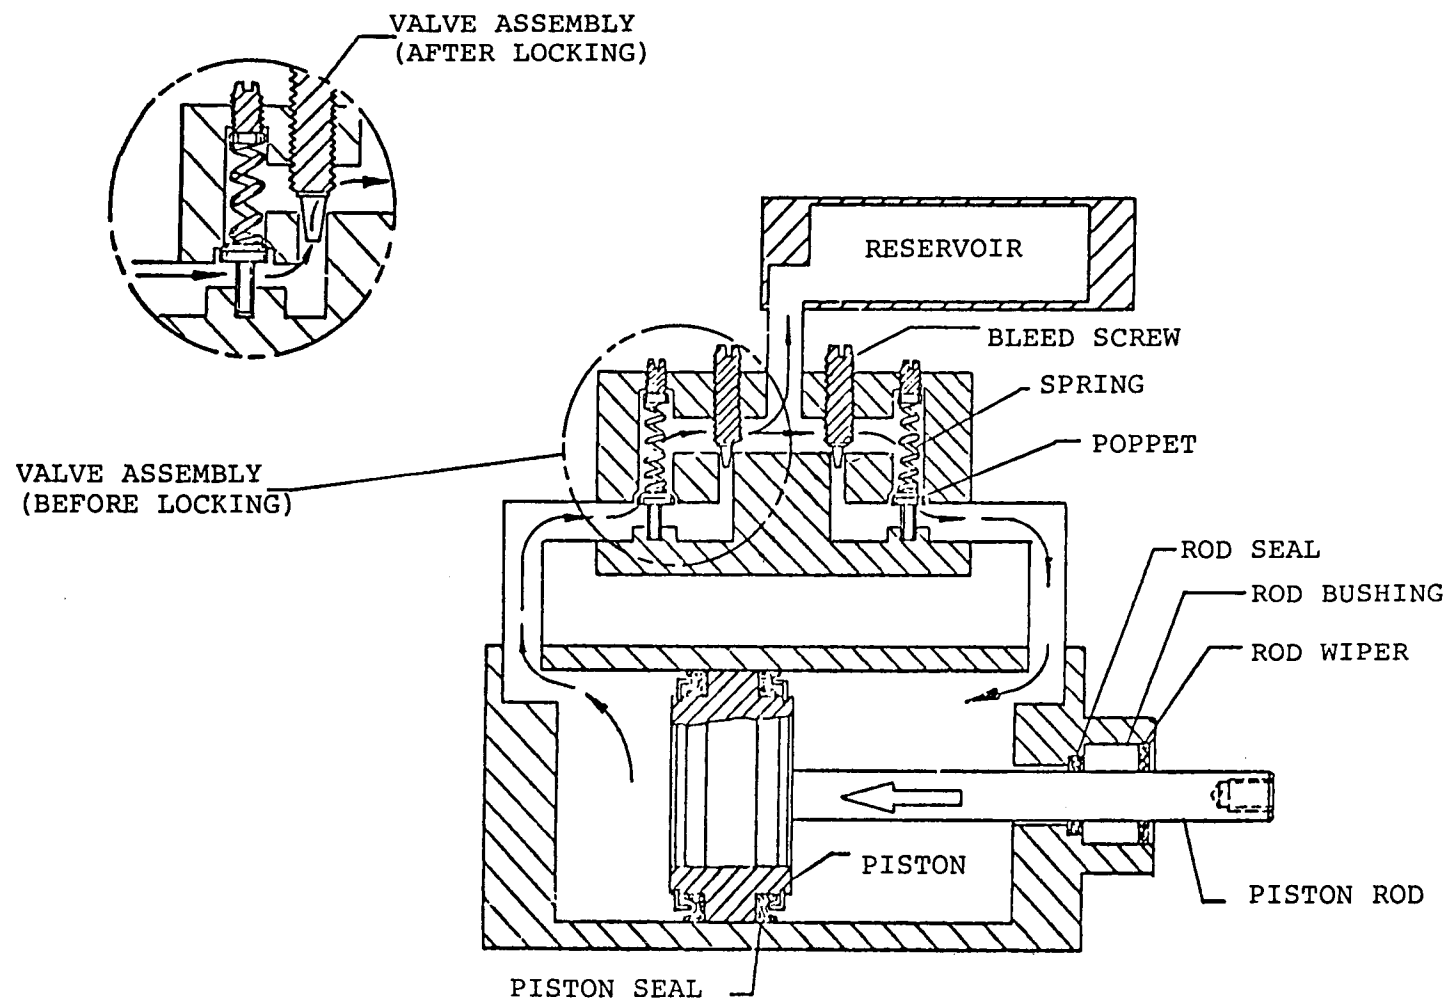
HYDRAULIC SNUBBER ASSEMBLY
